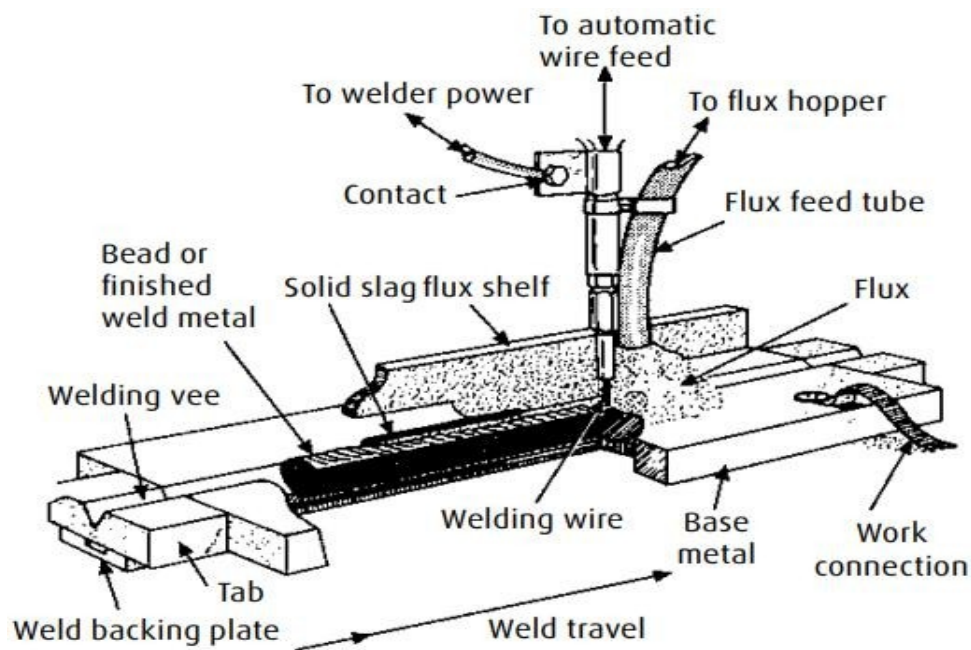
Submerged arc welding (Courtesy Slideplayer.com)
